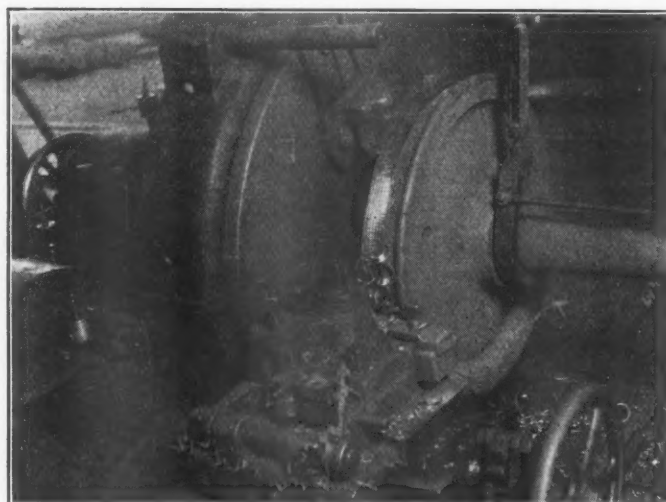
No. 18A Roughing Tool Used in Sellers Car Wheel Lathe
